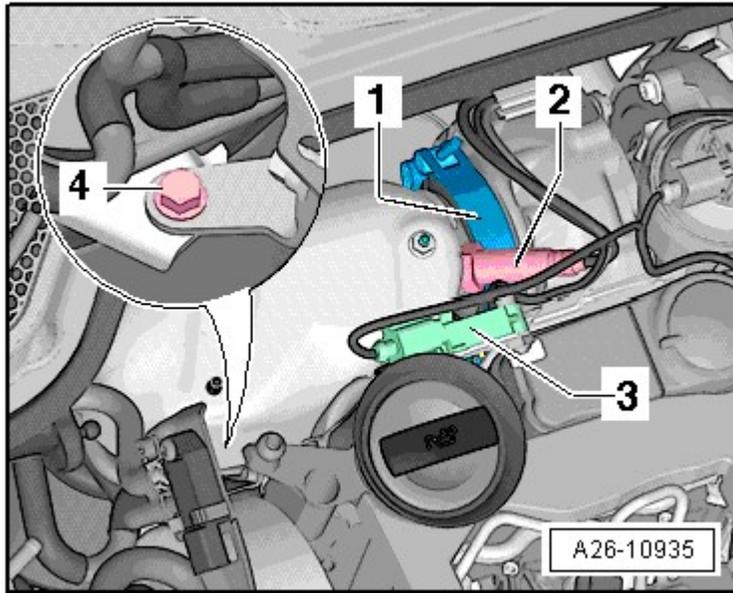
Exhaust Pressure Sensor 1 -G450- -3-
